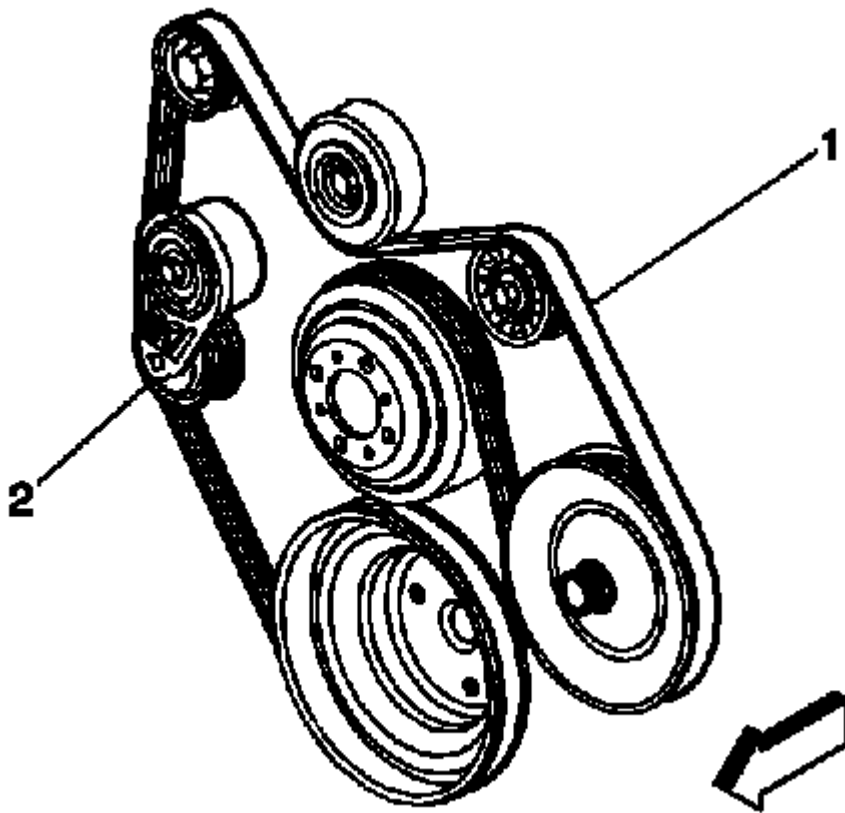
Drive Belt Routing And Tensioner (W/O A/C
